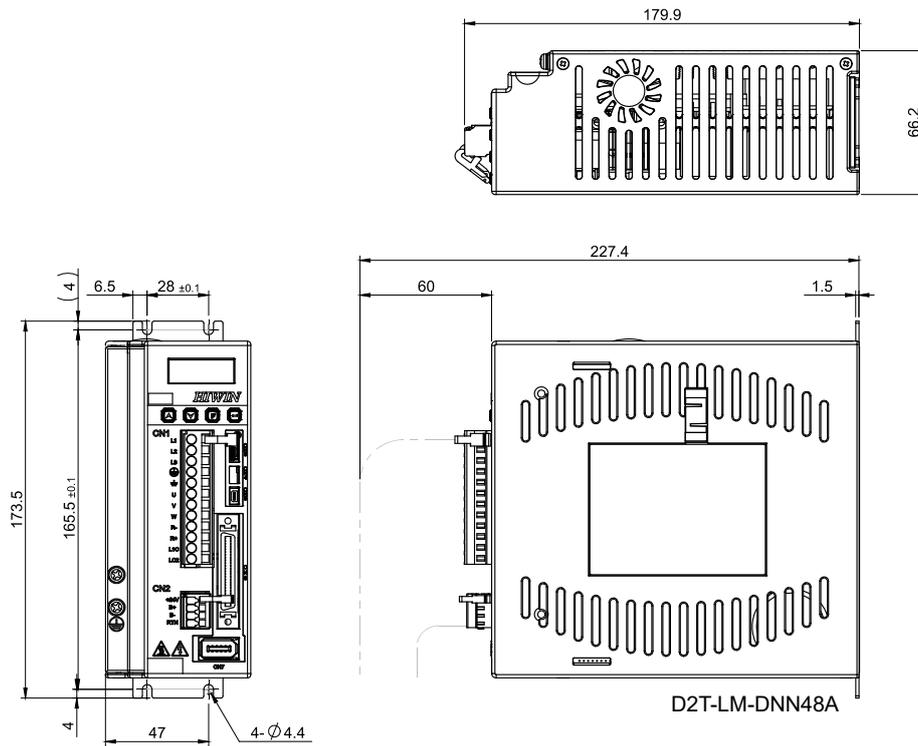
Dimensions of D2T-LM Frame C (Standard)
